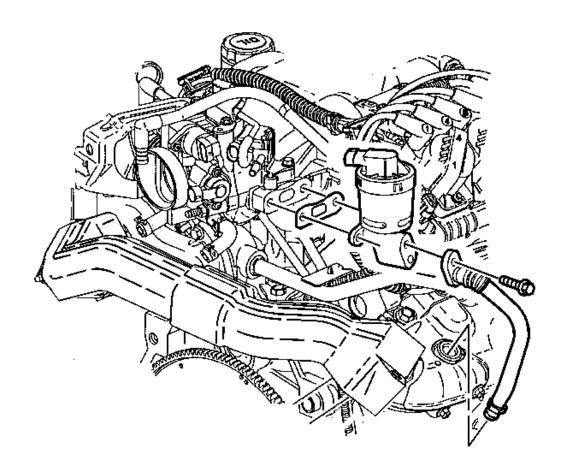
Installing EGR Valve Courtesy of GENERAL MOTORS CORP.
